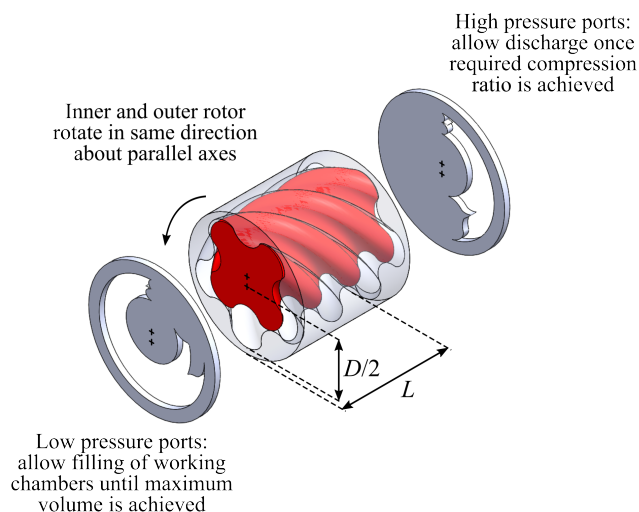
Illustration of the principal components of an internally geared screw machine [4].
